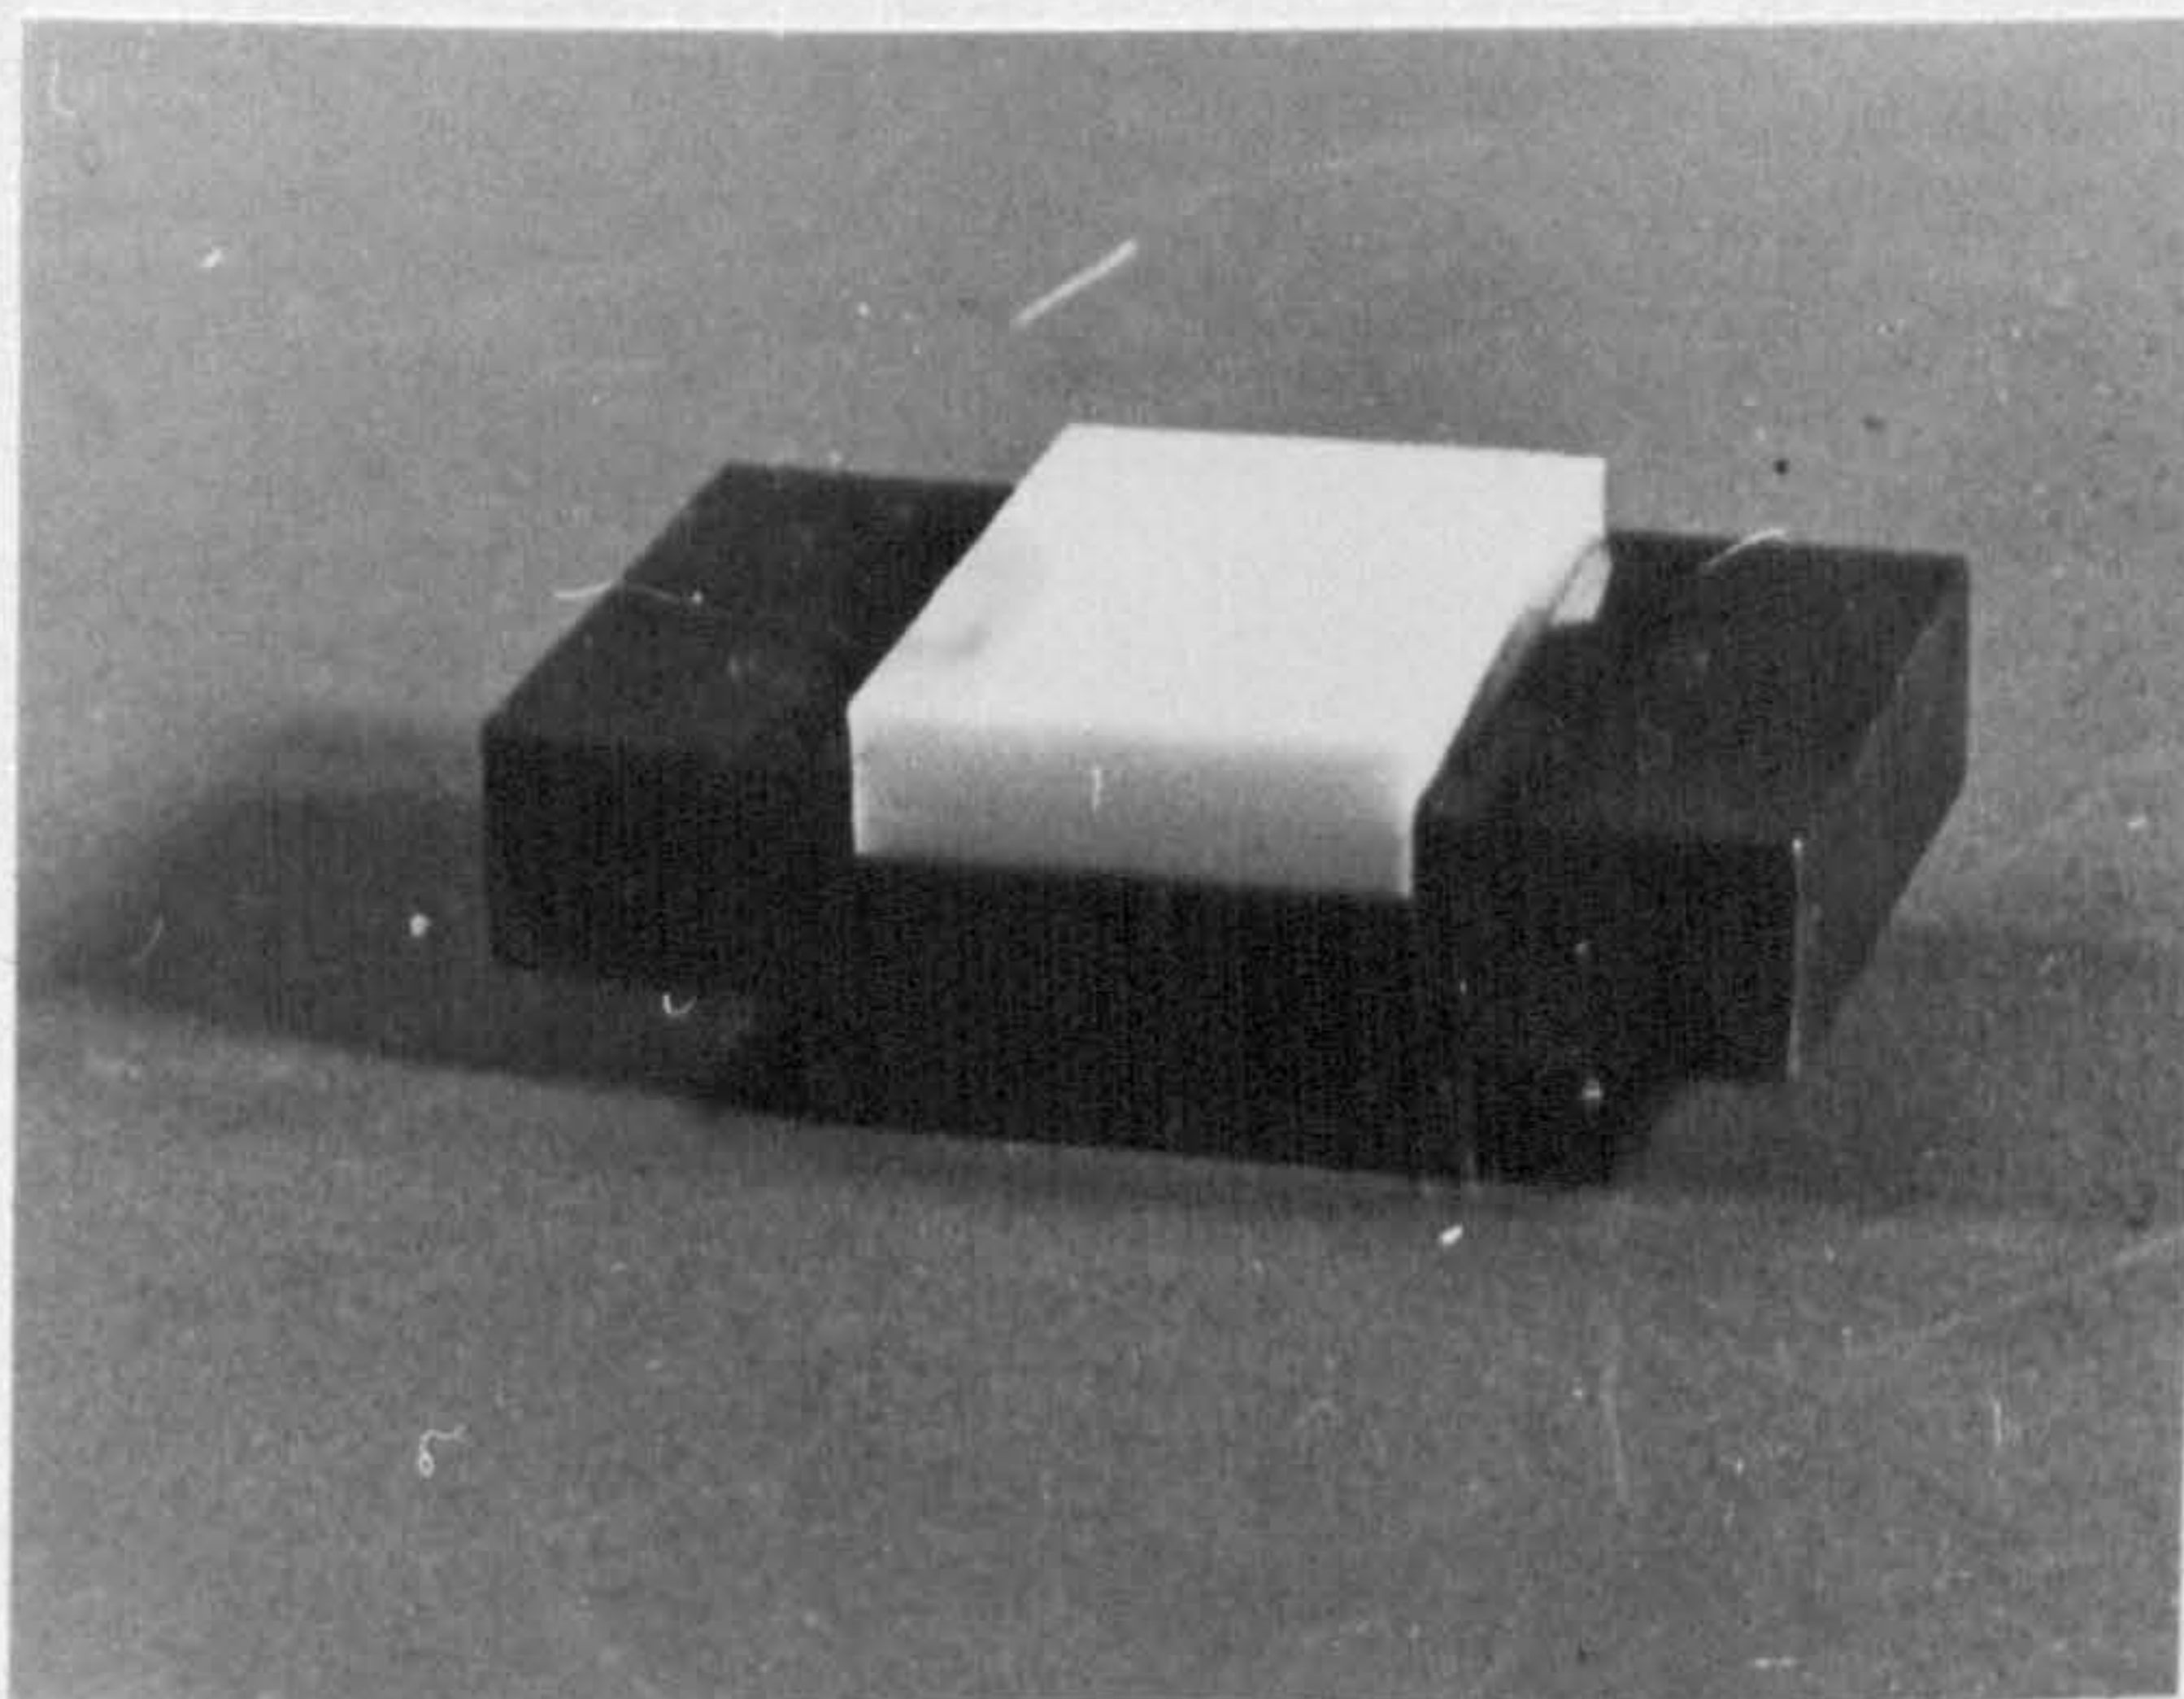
C. INSERT FOLLOWER SPECIMEN.
